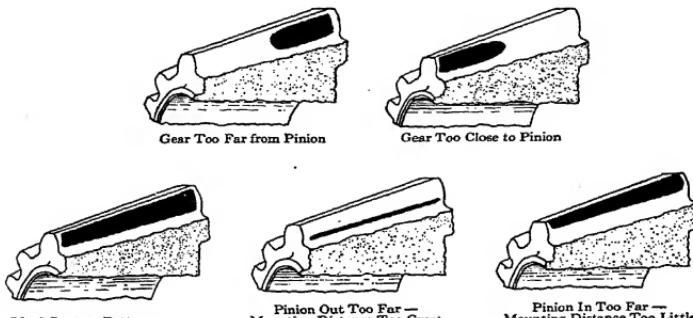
Full load contact made by gear teeth with good and bad mountings.
